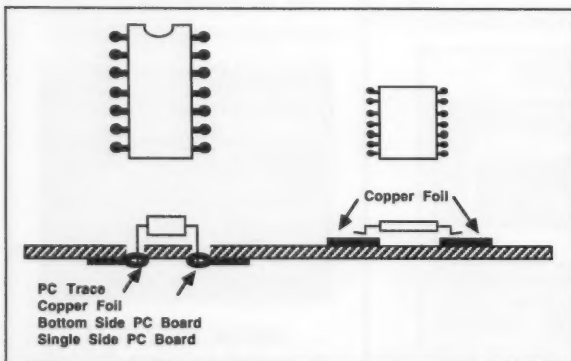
Standard 14-pin DIP, compared to a surface mount IC. The 14-pin DIP mounts through holes drilled in the PC board. Surface mount means just that—it is soldered on the component side of the PC board (no holes).
